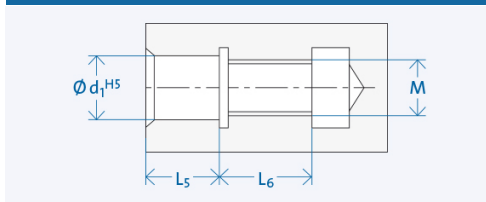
FOR GRINDING WHEELS ON THREADED PIN (PL)\
